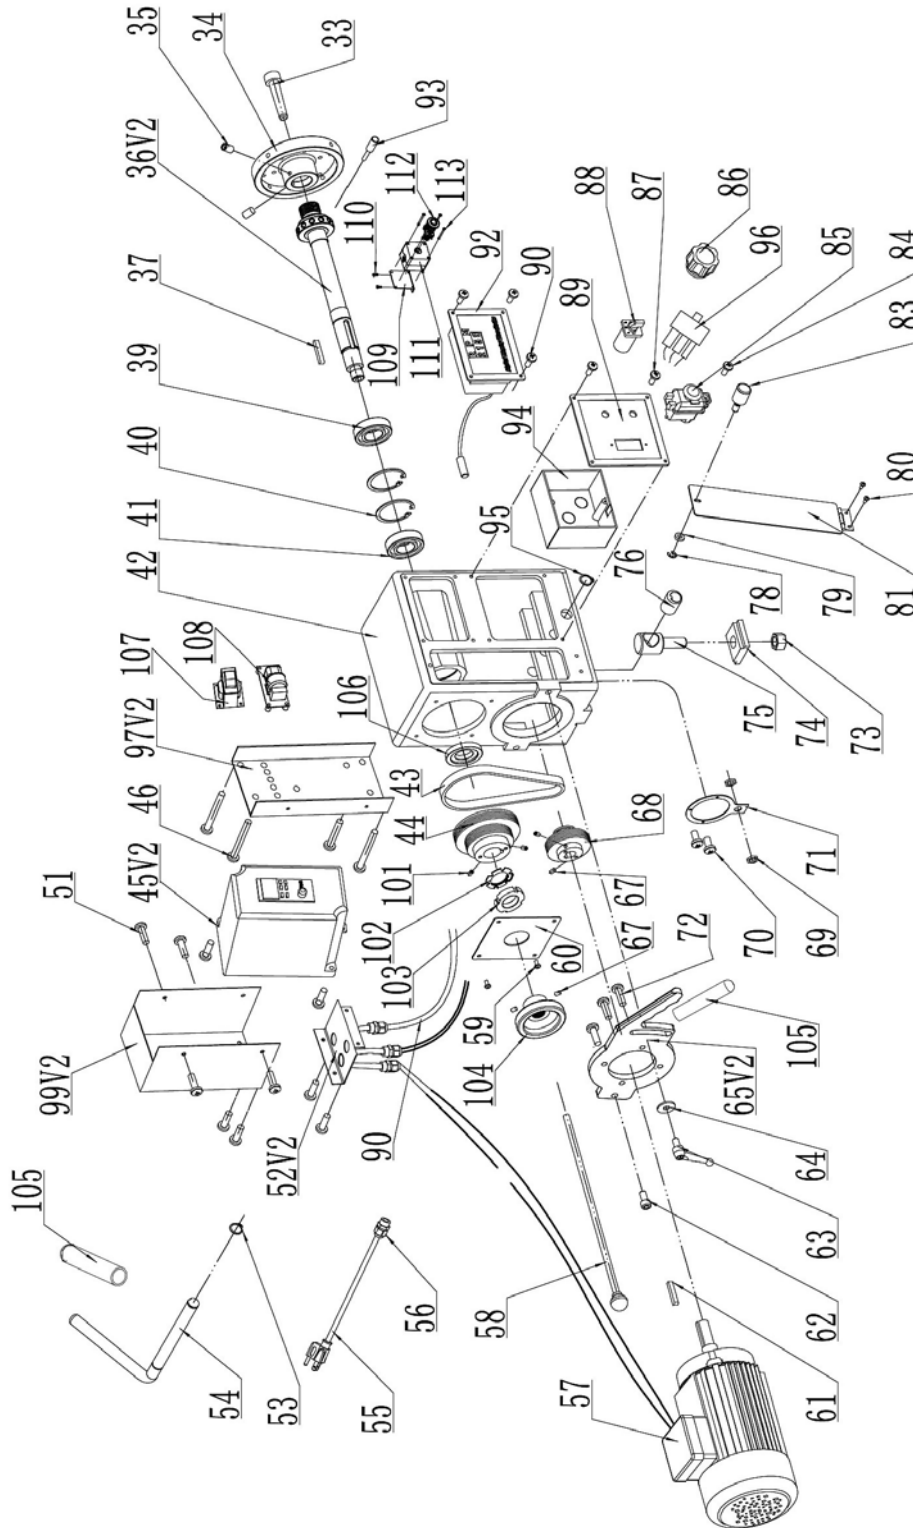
Spare parts drawing 1 Wood Lathe DB 1202 Vario
